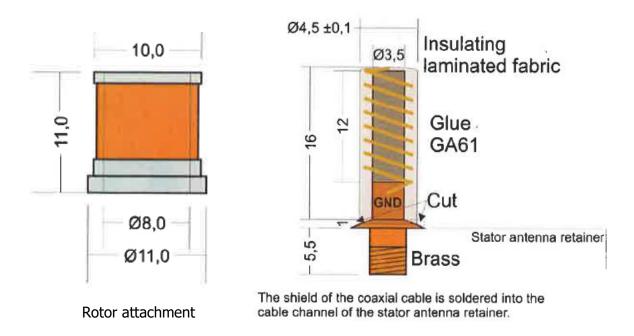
(a) : Rotor and stator antenna structure and dimensions [29]
